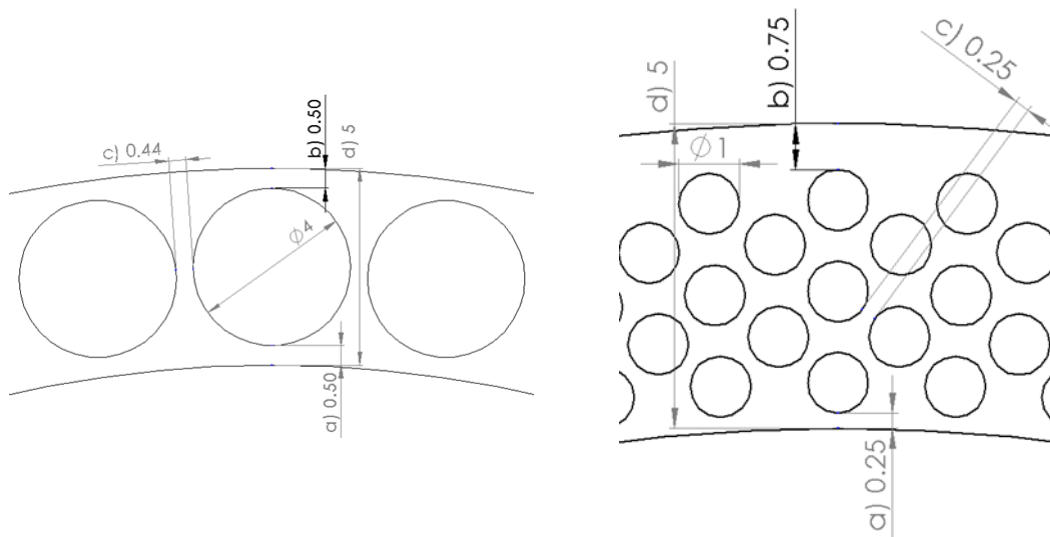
CAD drawings for single and stacked porosity designs.
